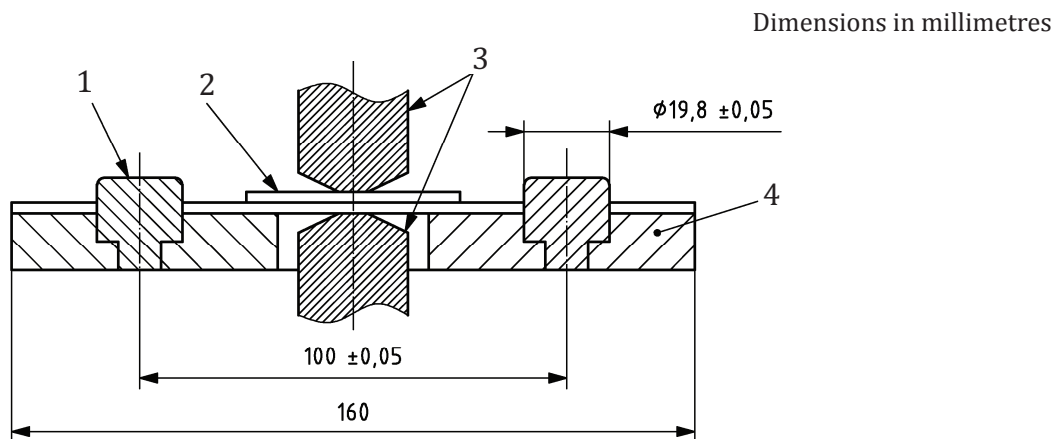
(#) and [3](#) illustrate examples of a welding jig/template, which can be used for welding the two sheets together. Two punched strips are placed at right angles to each other, held in the jig, and welded together. To obtain a statistically significant average, several specimens shall be tested.
